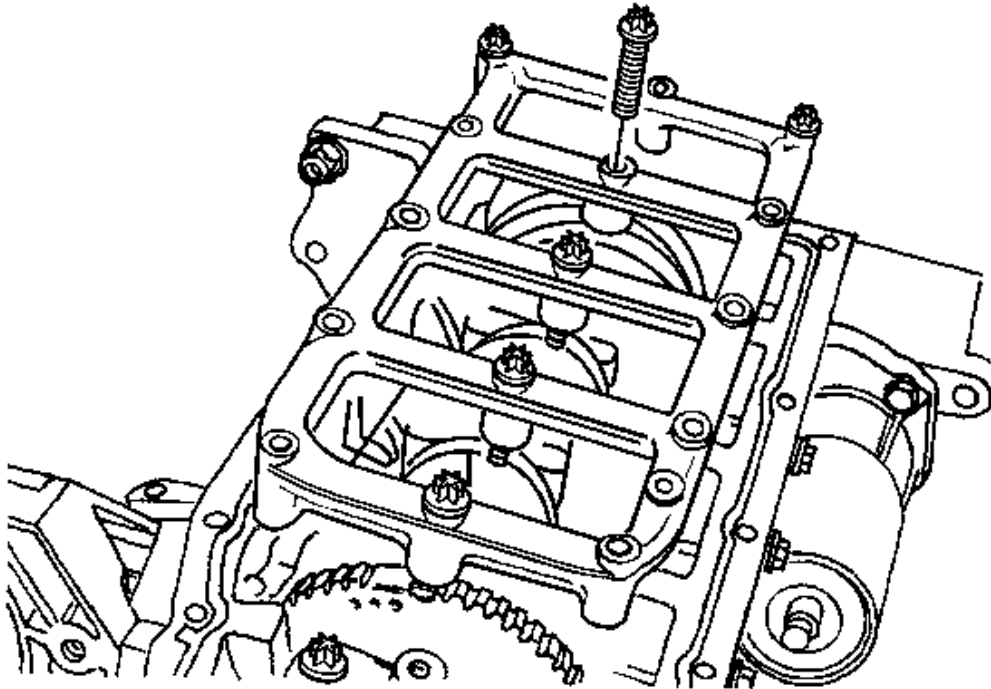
View Of Crankshaft Bearing Bridge And Bolts
